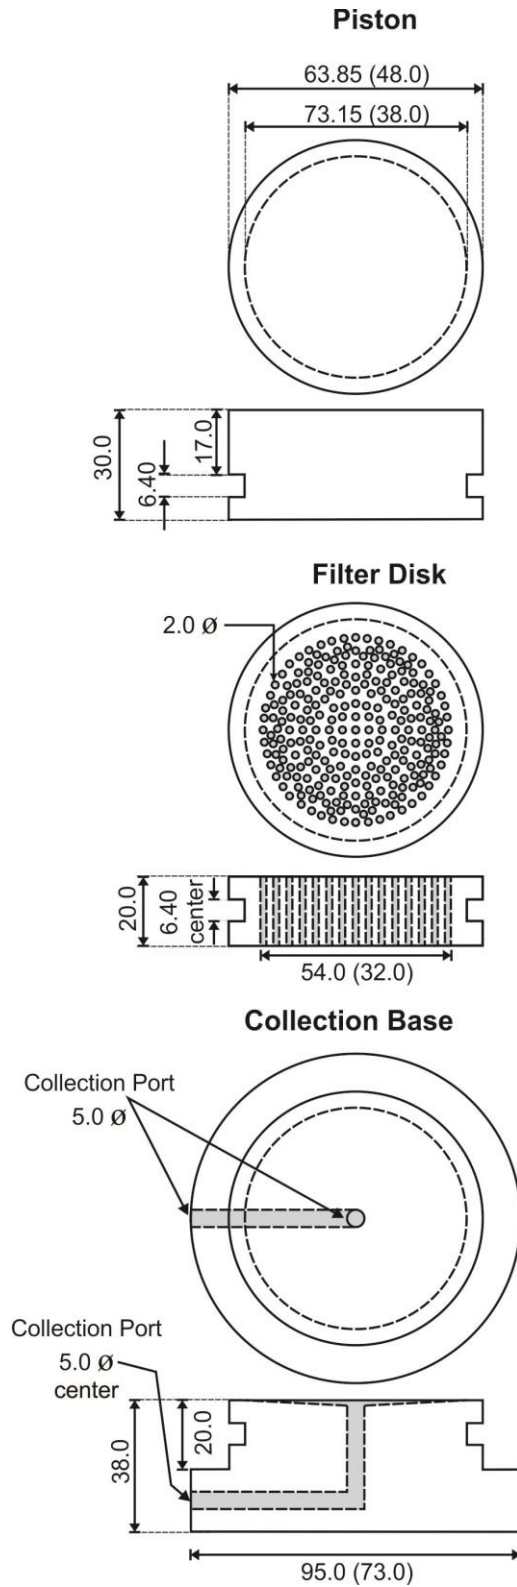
Schematic diagram showing dimensions of squeezer components. All values are in millimetres, and dimensions are for both 5.1 cm (2-in.) and 7.6 cm (3-in.) squeezer parts. Values in brackets correspond to 5.1 cm squeezer components.
